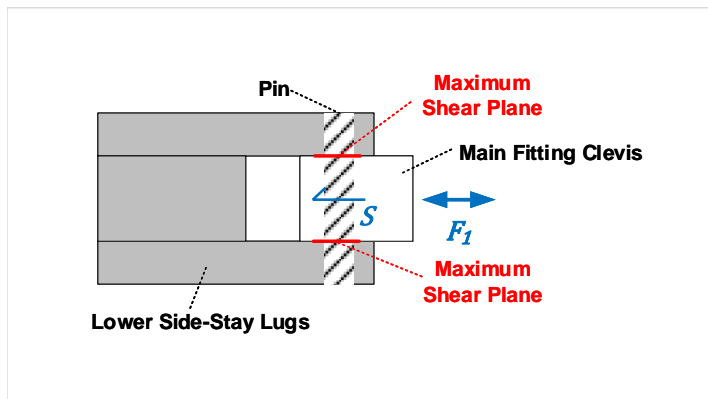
A clevis / double shear pin joint as typically used in landing gear assemblies, highlighting how the axial load is converted to a pin shear load.
